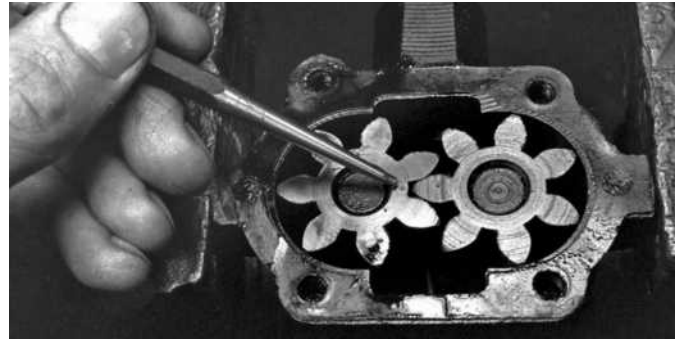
Mark the gear teeth so they can be reassembled with the same indexing.
